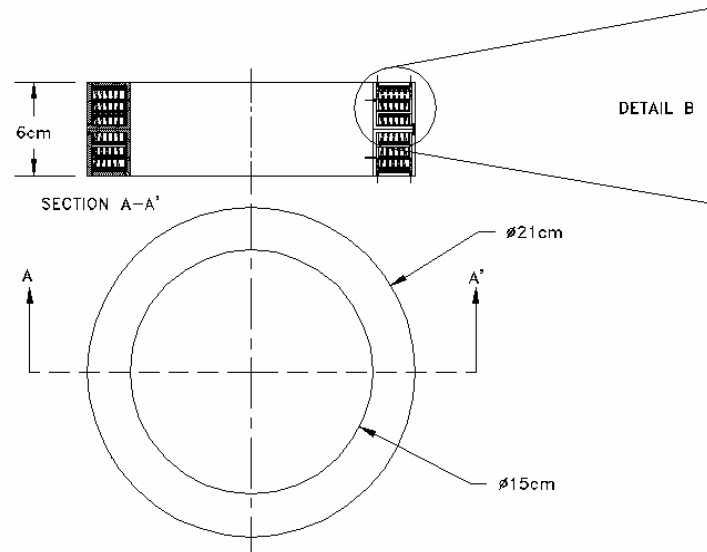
Envelope Drawing for the MHD Actuator / Sensor Assembly
